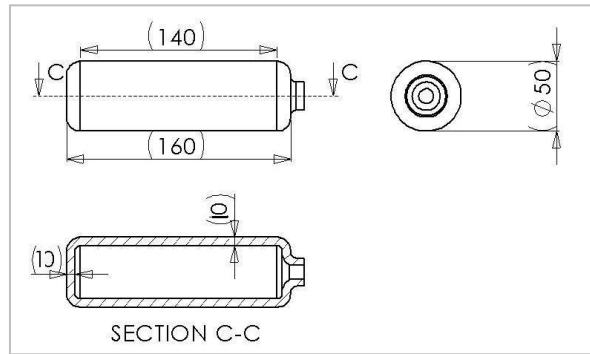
6: CAD drawings for ductile pressure vessel calculation illustration [123]
